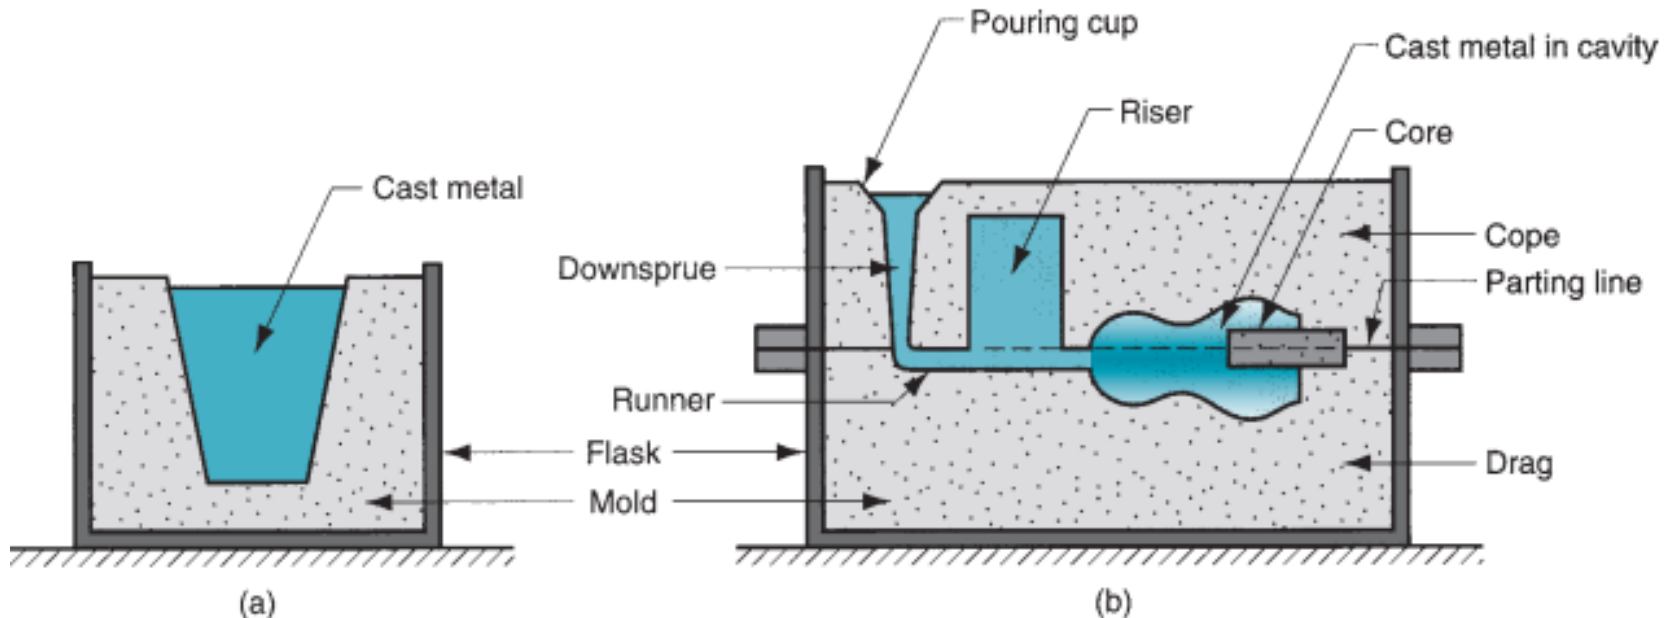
Two forms of mold: (a) open mold, simply a container in the shape of the desired part; and (b) closed mold, in which the mold geometry is more complex and requires a gating system (passageway) leading into the cavity.
